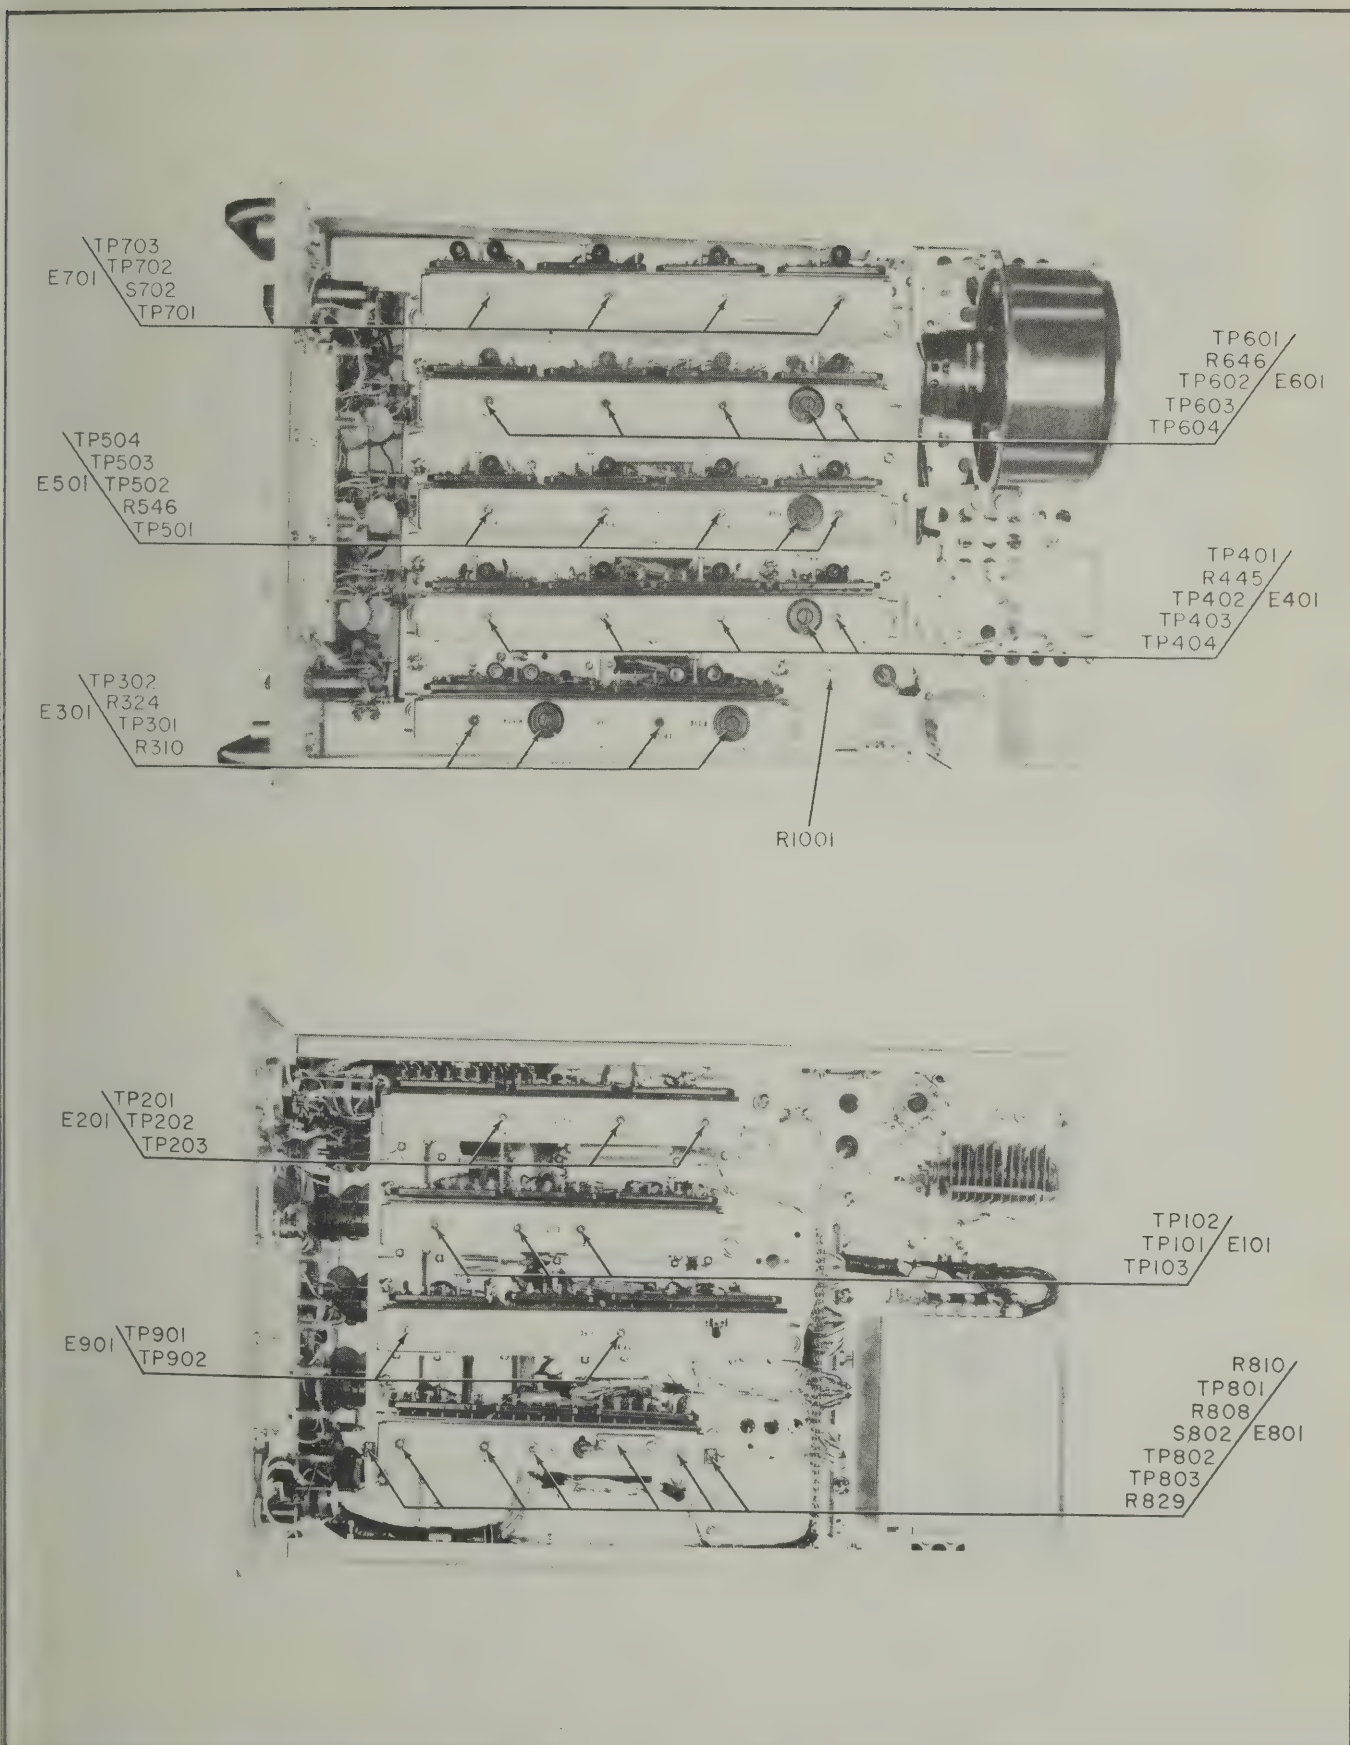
A. Top and Bottom Chassis Views, TS-573A/UP
